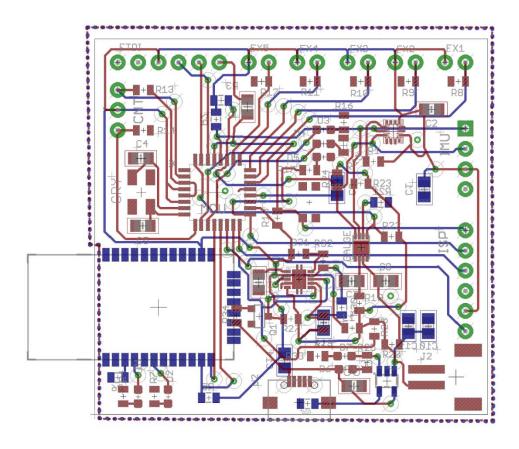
ASLA's 2 layer PCB Design
